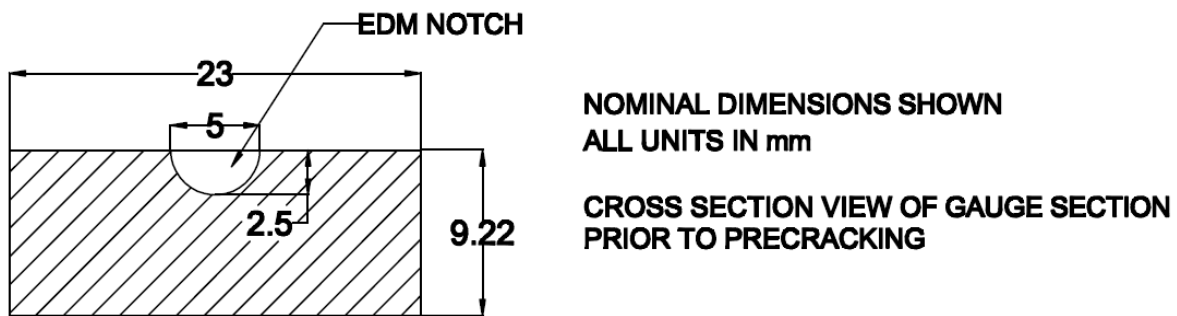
Surface crack specimen gauge section – cross-section view
